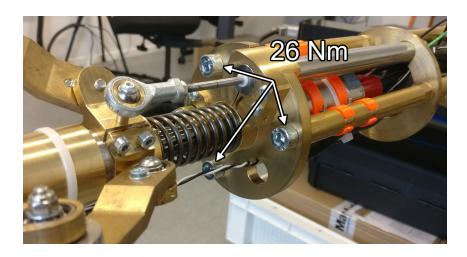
DL20 Assembly - Longitudinal Rods (26 Nm).
